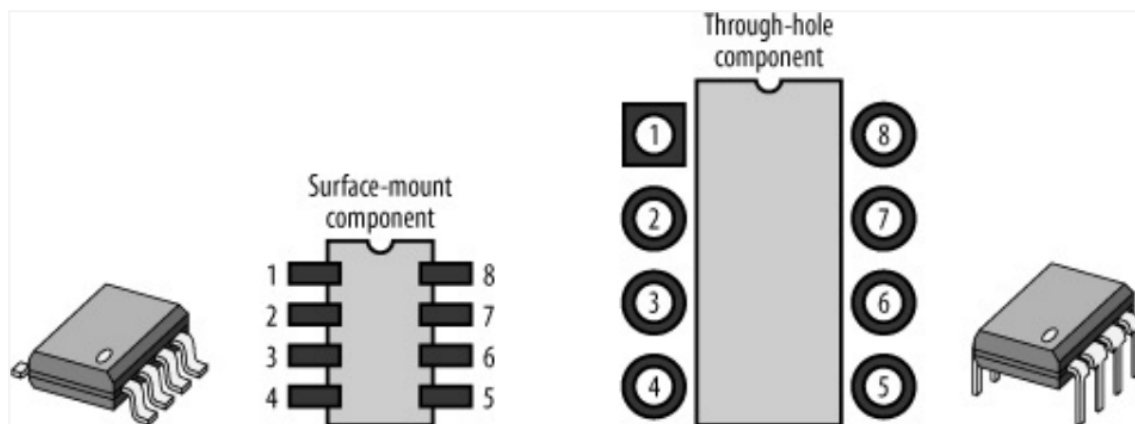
Footprints of surface-mount and through-hole (multilayer) component [10, p.143]
